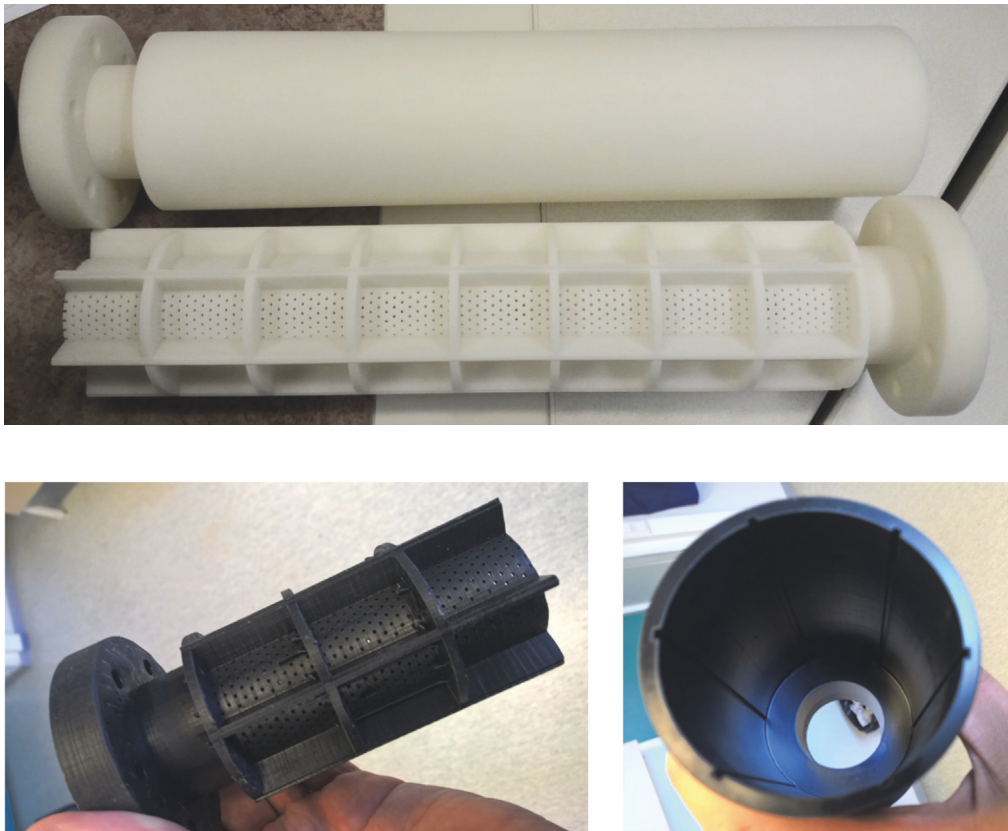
Long and short silencer versions. Bottom figure shows grooves for assembling the parts tightly together.
